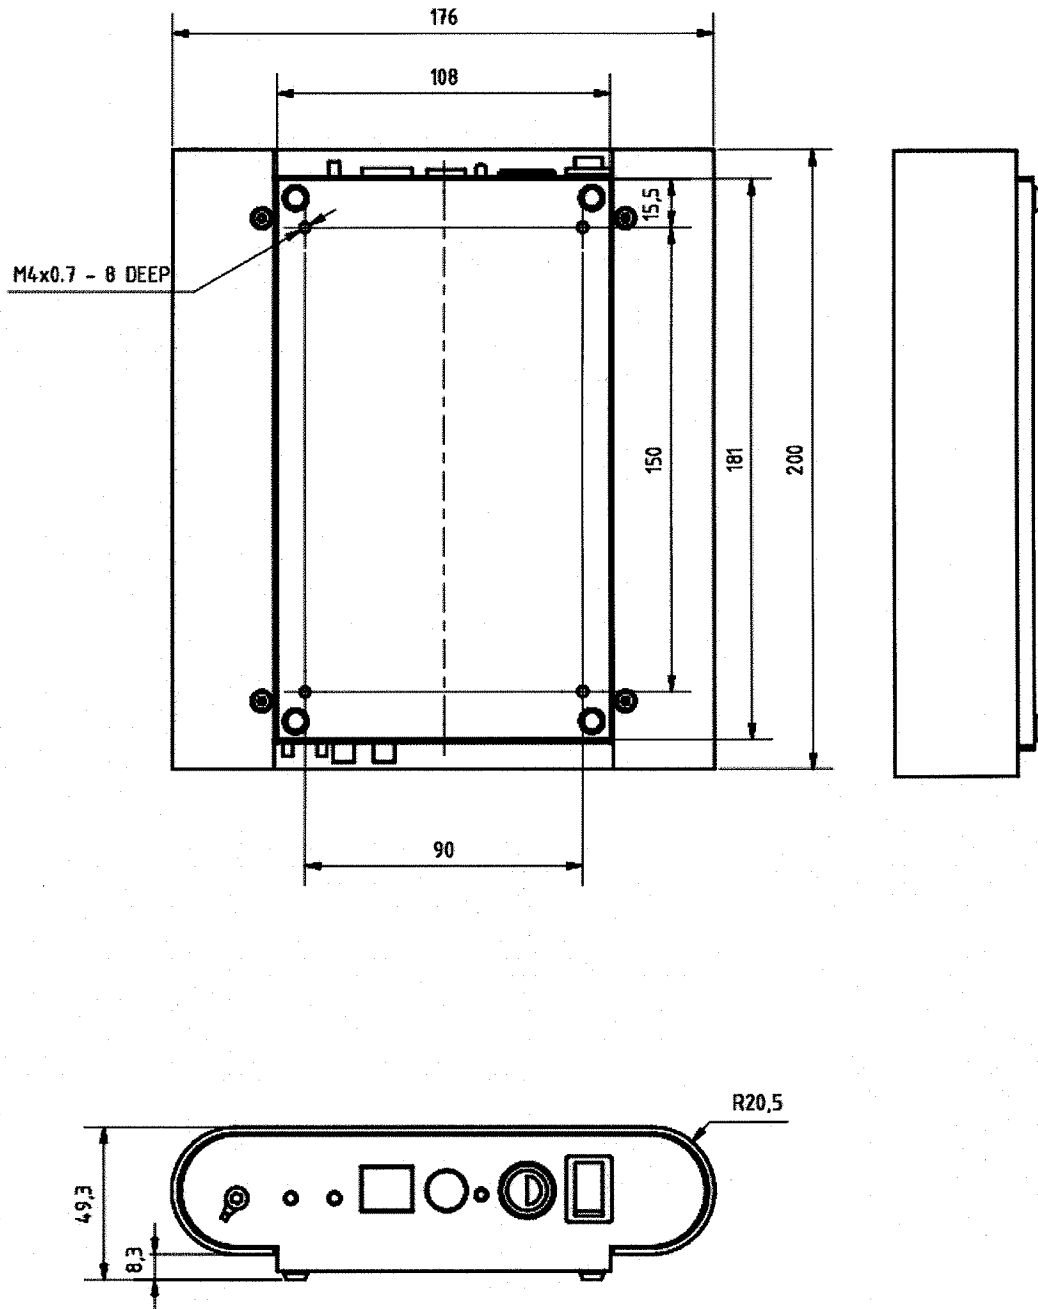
Dimensions of detector control system with position of tap holes for mounting the DCS1.
